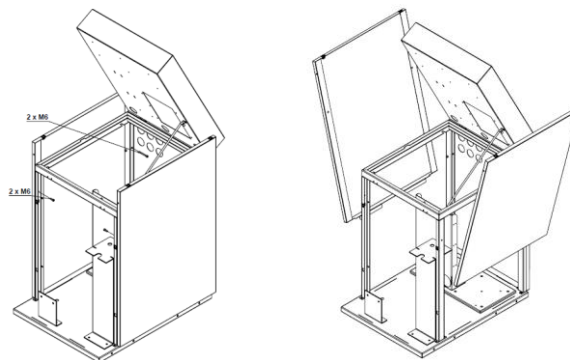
Disassembly process of the lateral covers of Clausius heat pumps with Classic configuration.
